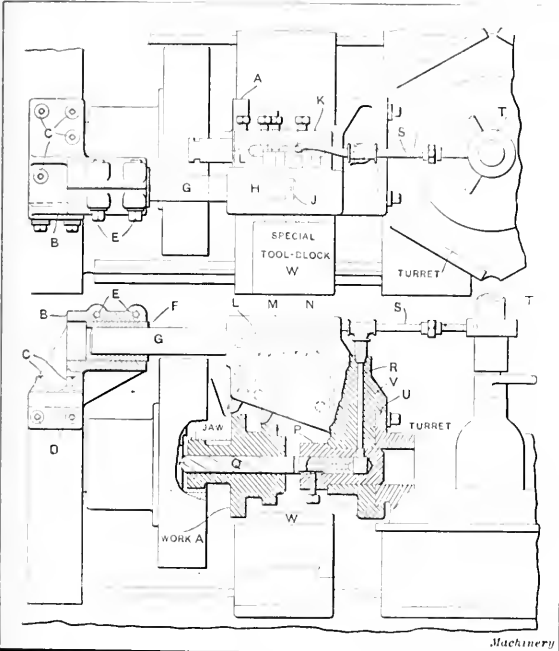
Piloted Multiple Turning Tool for Gear Blanks
